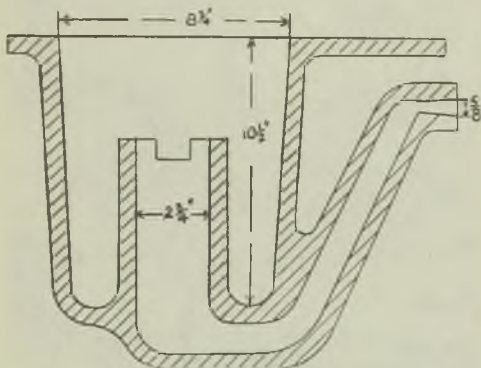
PRESSURE POT FOR A DIE-CASTING MACHINE, MADE IN AUSTENITIC CAST IRON.
